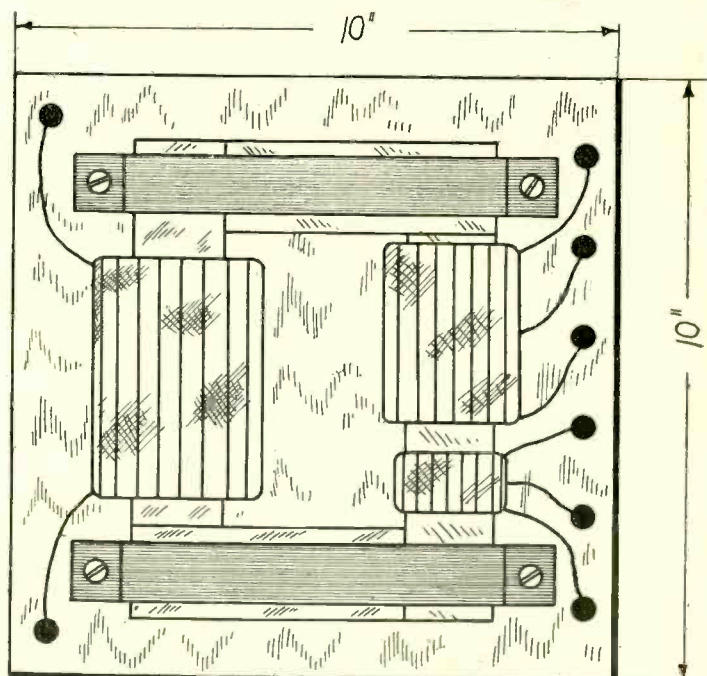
Top view of the completed transformer showing location of binding posts and also the final placement of the coils.
